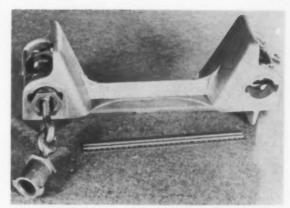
Single track shoe casting showing installation of parts in Fig. 4.
